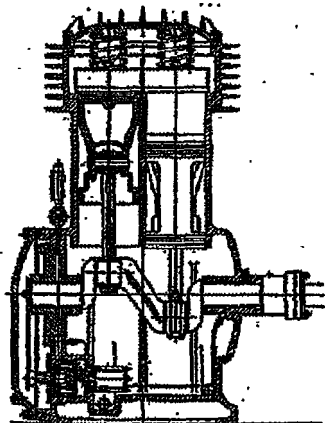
SECTION THROUGH A TYPICAL BOOSTER COMPRESSOR.
